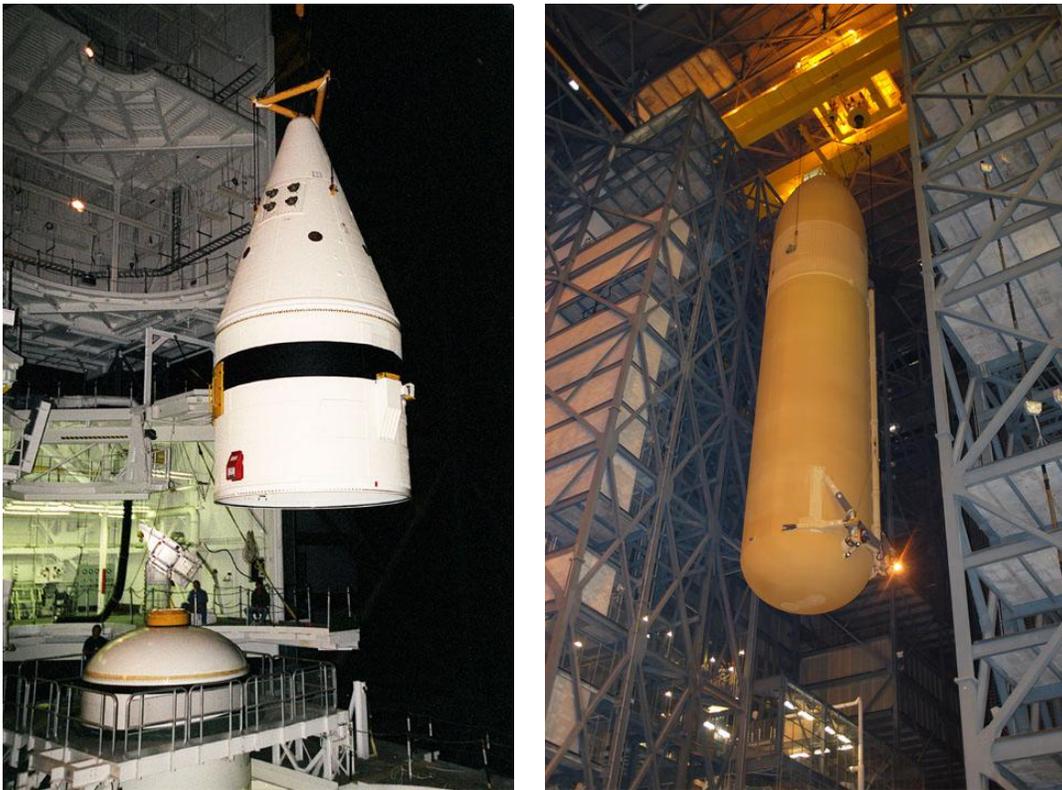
SRB Forward Skirt Assembly and External Tank Transfer
